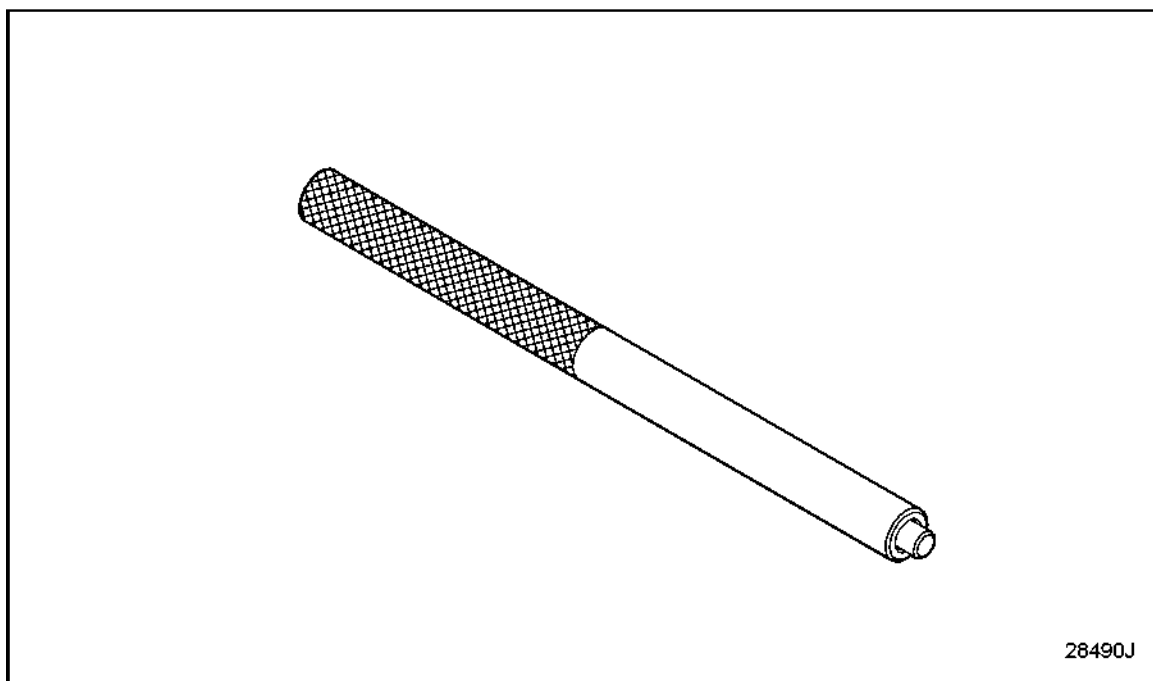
Water Hole Sleeve Installer,J 24233-01
